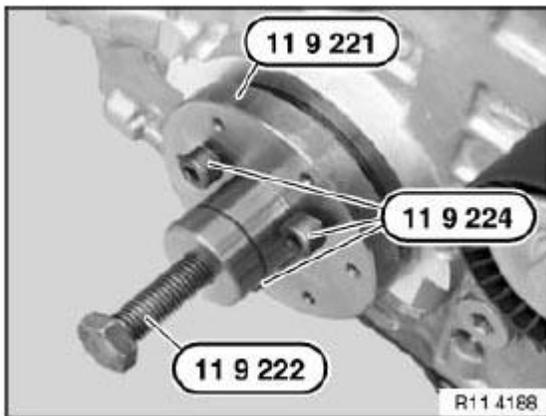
Pushing Special Tool 11 9 221 Onto Crankshaft
